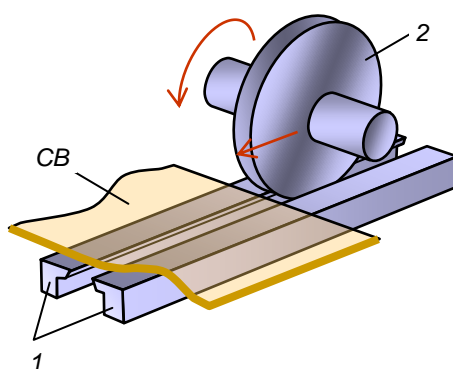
Scheme of groove making in cardboard blank by scissor method using disk cut tool, authors'
